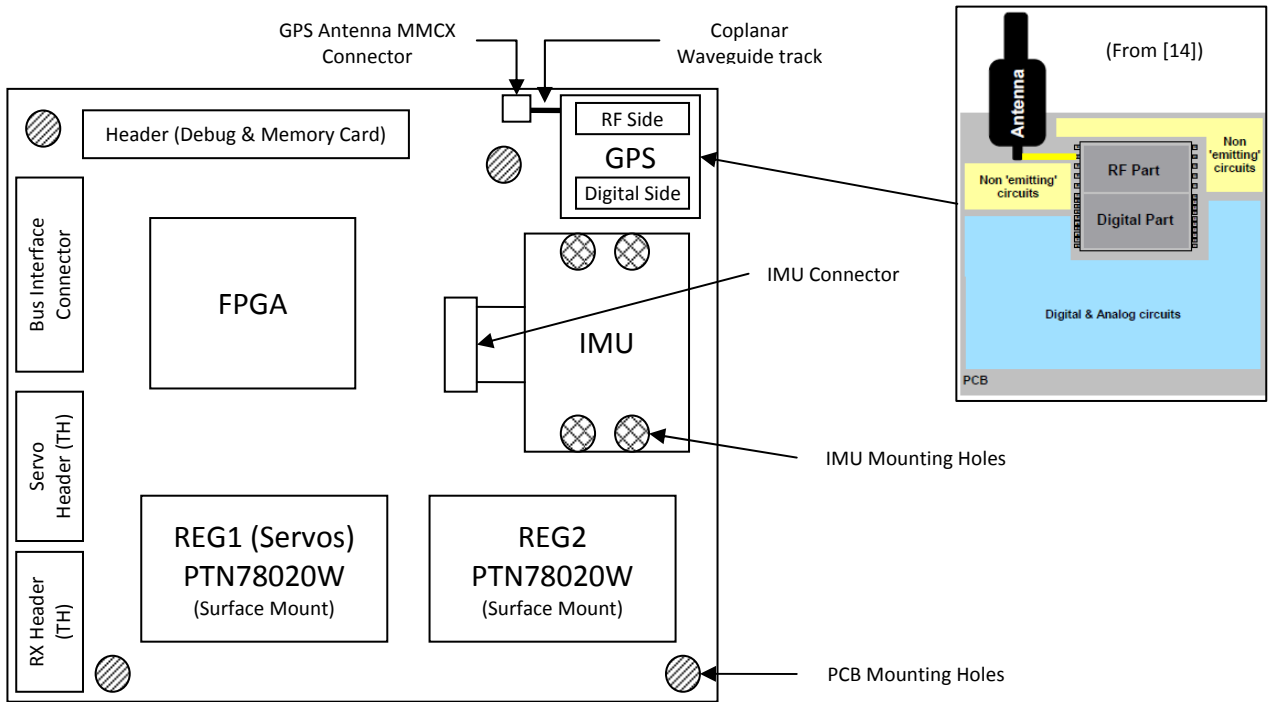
Component Placement Strategy overview of the Top PCB Layer
